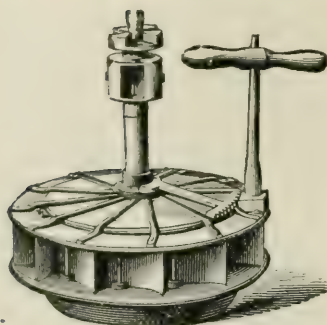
STANDARD LEFFEL TURBINE; 1866.
